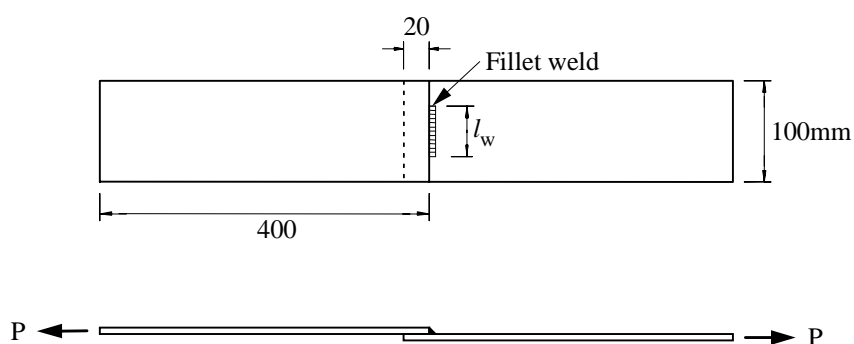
Diagram of a single-lap transverse fillet welded connection specimen
